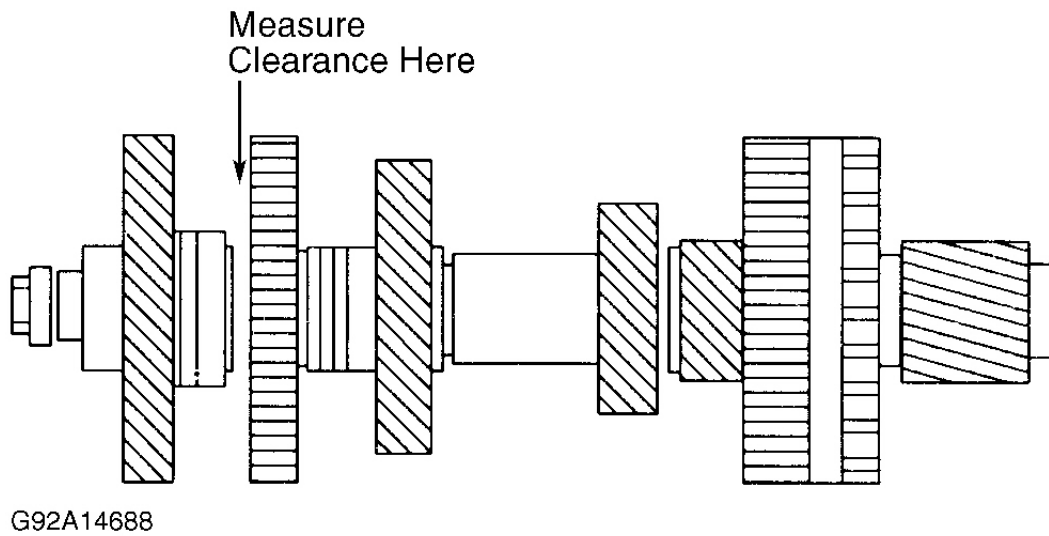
Checking Reverse Gear-To-Thrust Washer Clearance
